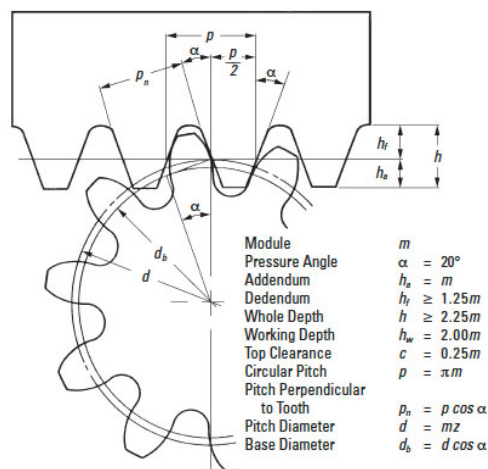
The Tooth Profile and Dimension of Standard Rack
